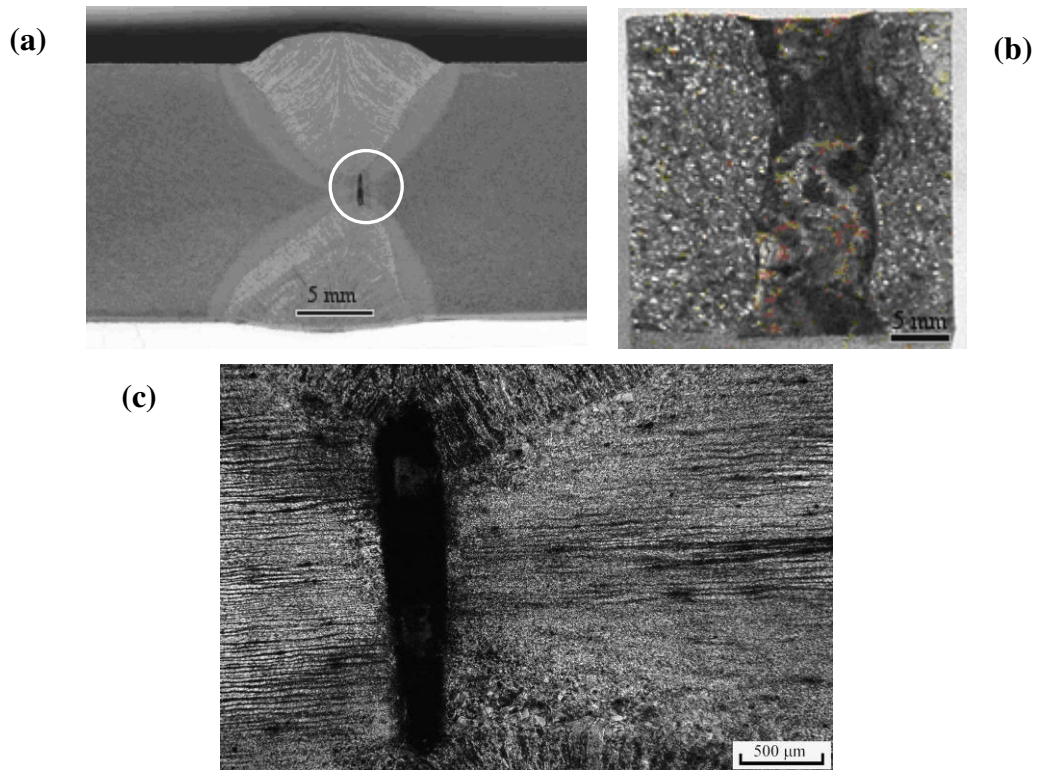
Examples of Lack of Penetration Defects from the 15.3 mm/s welding speed. (a) Macrograph, (b) fracture surface broken at  $-190\text{ }^{\circ}\text{C}$ , (c) micrograph.
